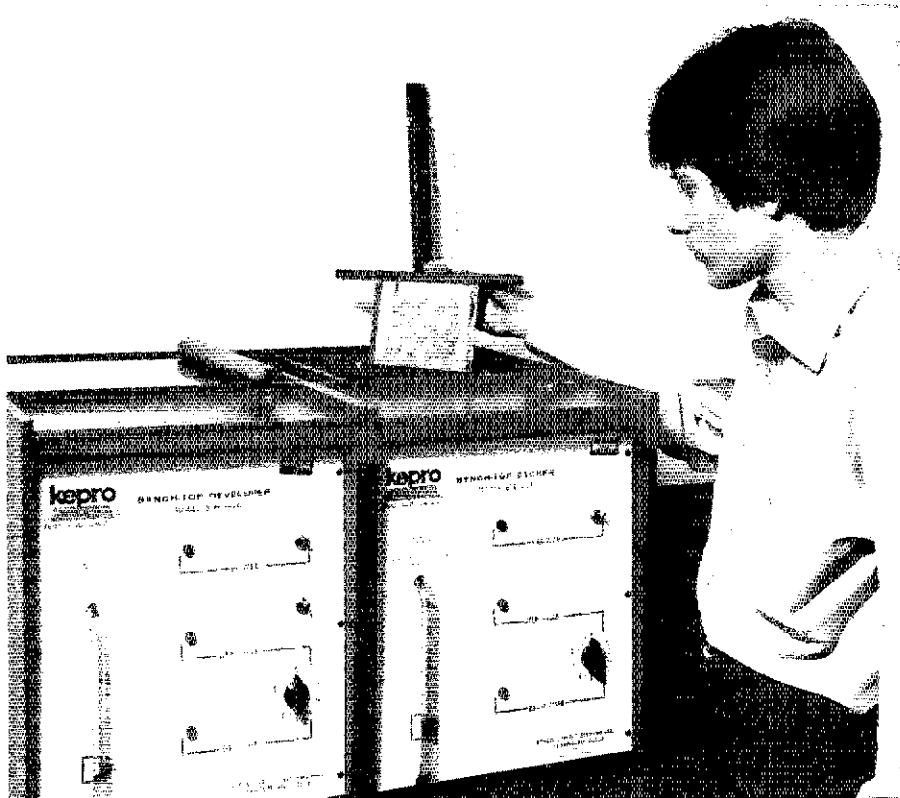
Tom Miller, NK1P, checks a PC board during the etching process. This Kepro system employs closed tanks, ensuring a great degree of safety.
